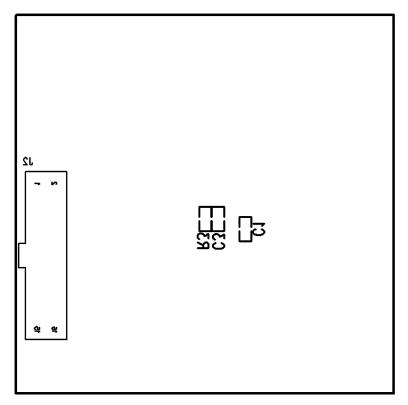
Bottom Silk Layer (Shown 2.6X actual size)
